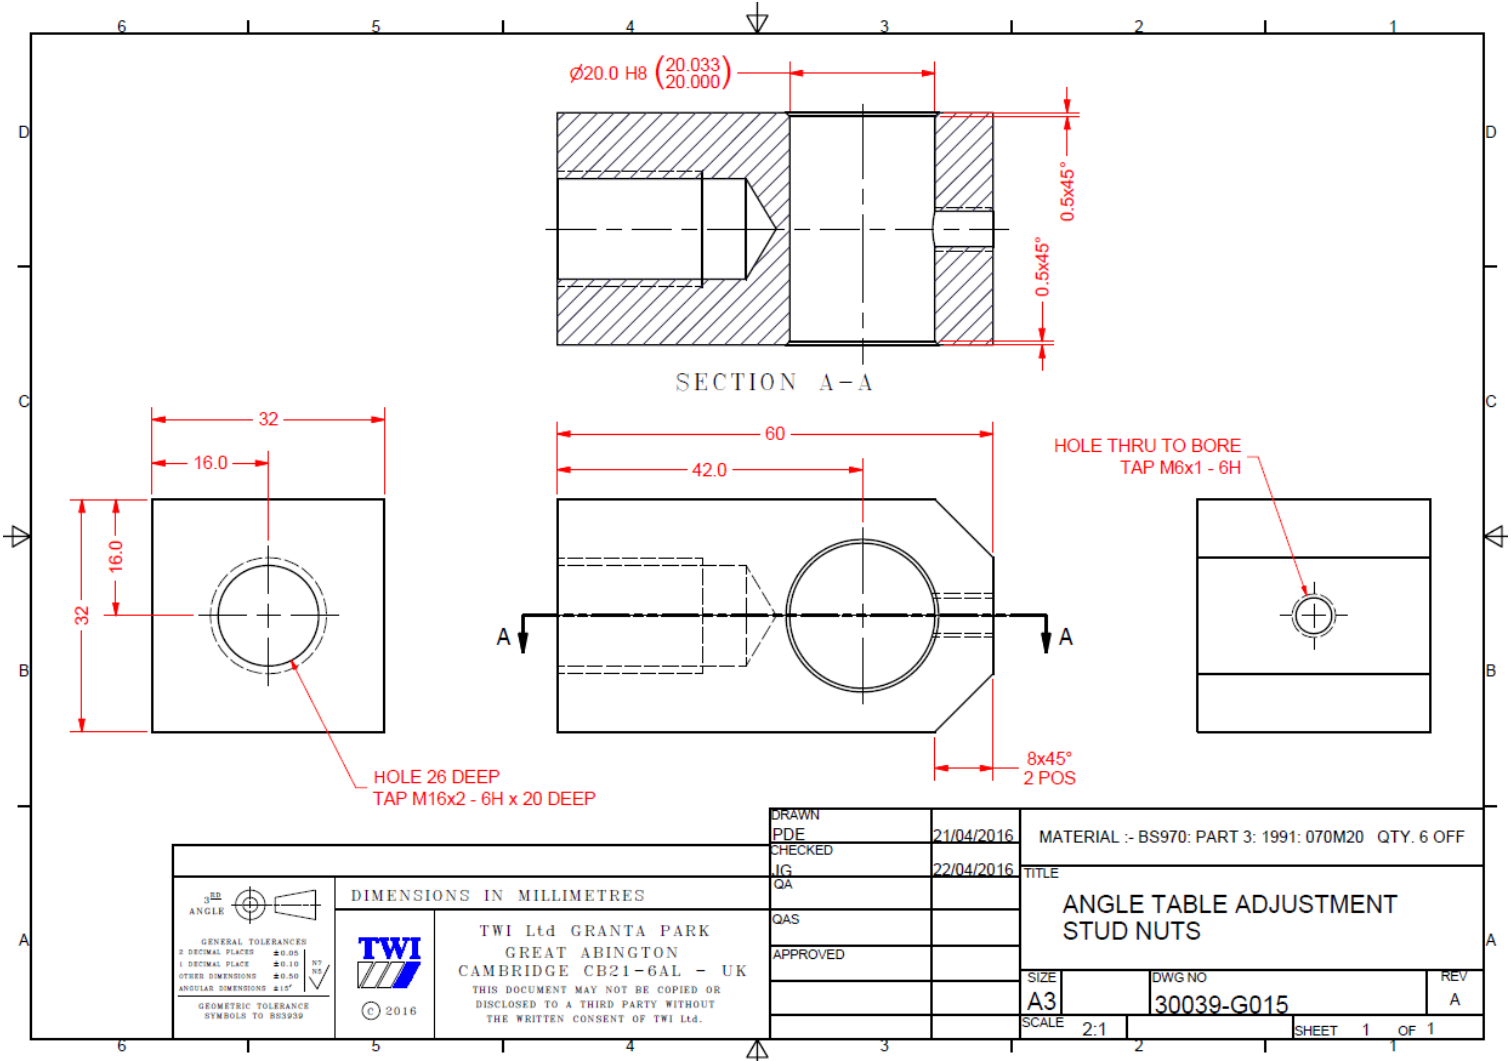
Technical drawing of the adjustment stud nuts of the tilting table
